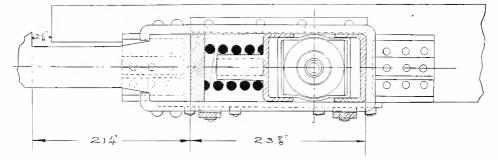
Harvey Friction Draft Spring. Frost Railway Supply Co.
